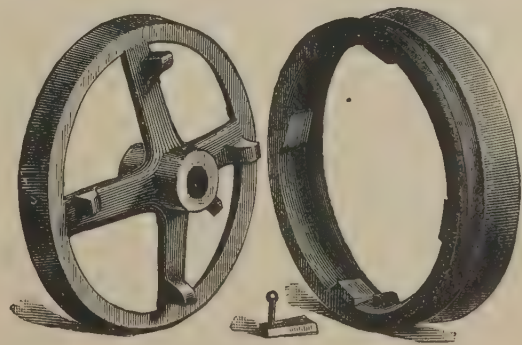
TWO PART ADJUSTABLE PULLEY.
